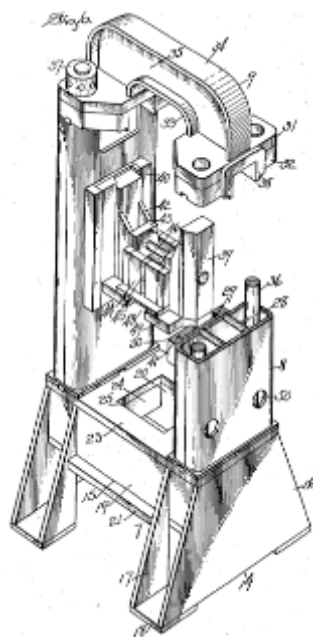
Typical structure for a mechanical closed-frame press, driven from the superior part [2]
